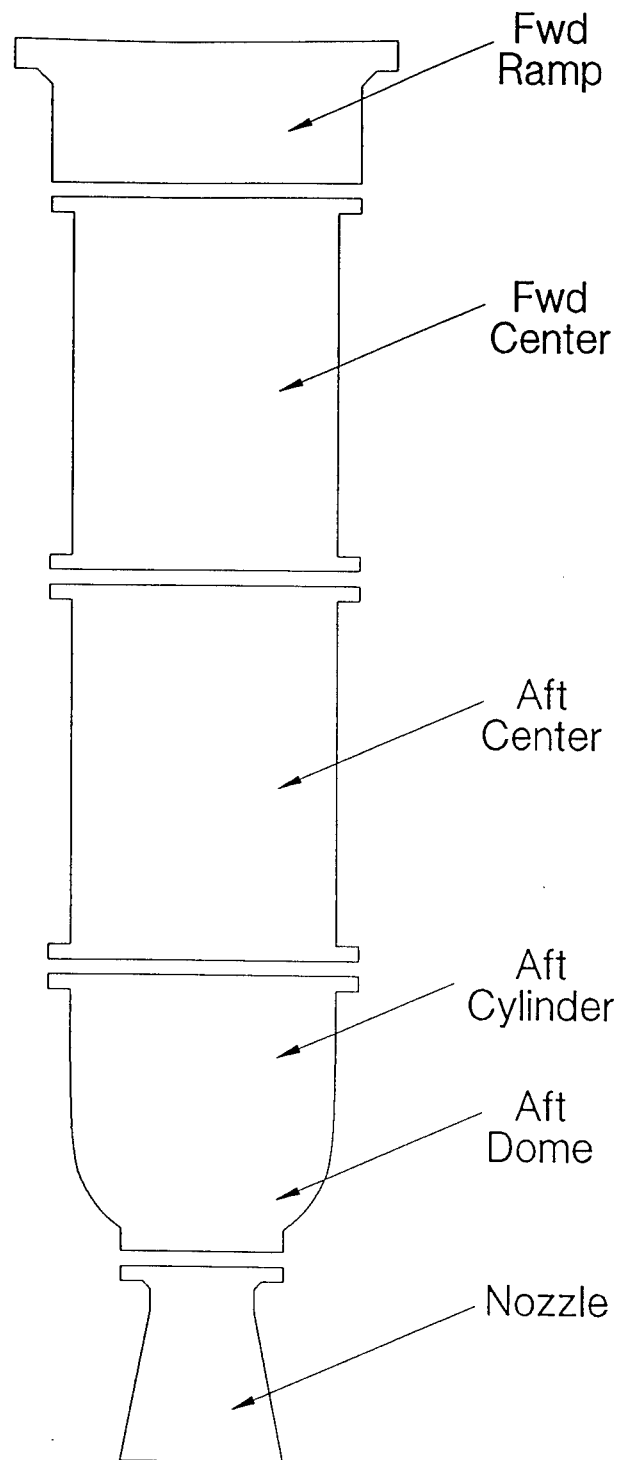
Redesigned Solid Rocket Motor Blast Tube
